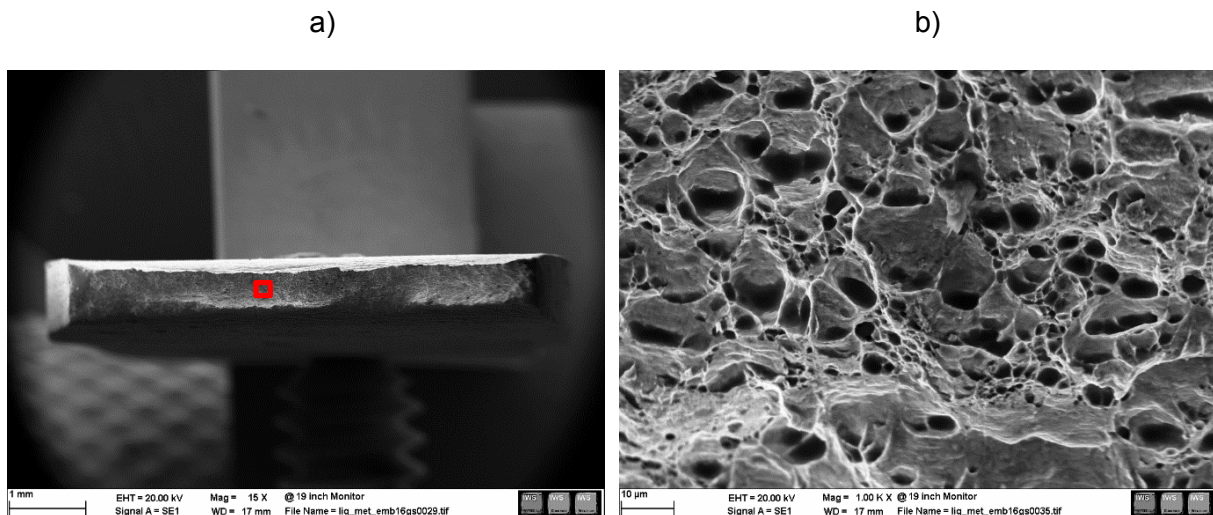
Fracture surface of 301M steel tensile tested at 800°C with 1 mm/s strain rate: a) Overview of fracture surface with rectangle showing the magnified area of b): higher magnification of fracture surface revealing dimples all over the area
